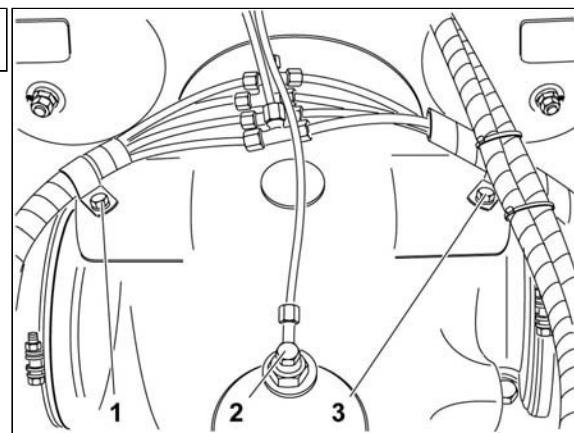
Installation of bleeding manifold and attachment of air pipes
